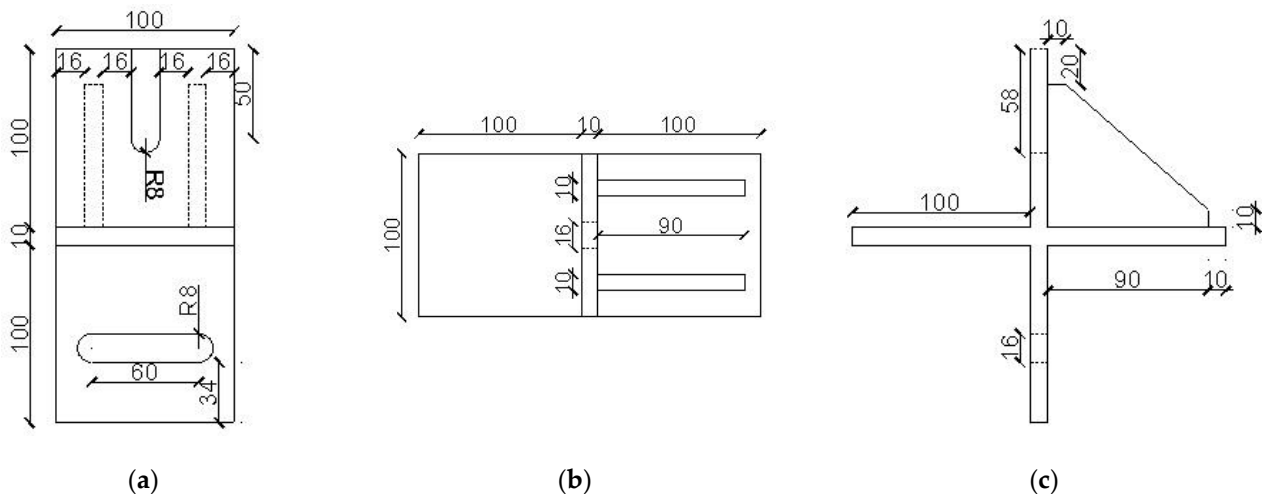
Dimensional drawing of the new energy dissipation connector: (a) Front View; (b) Overhead view; (c) Side view.
